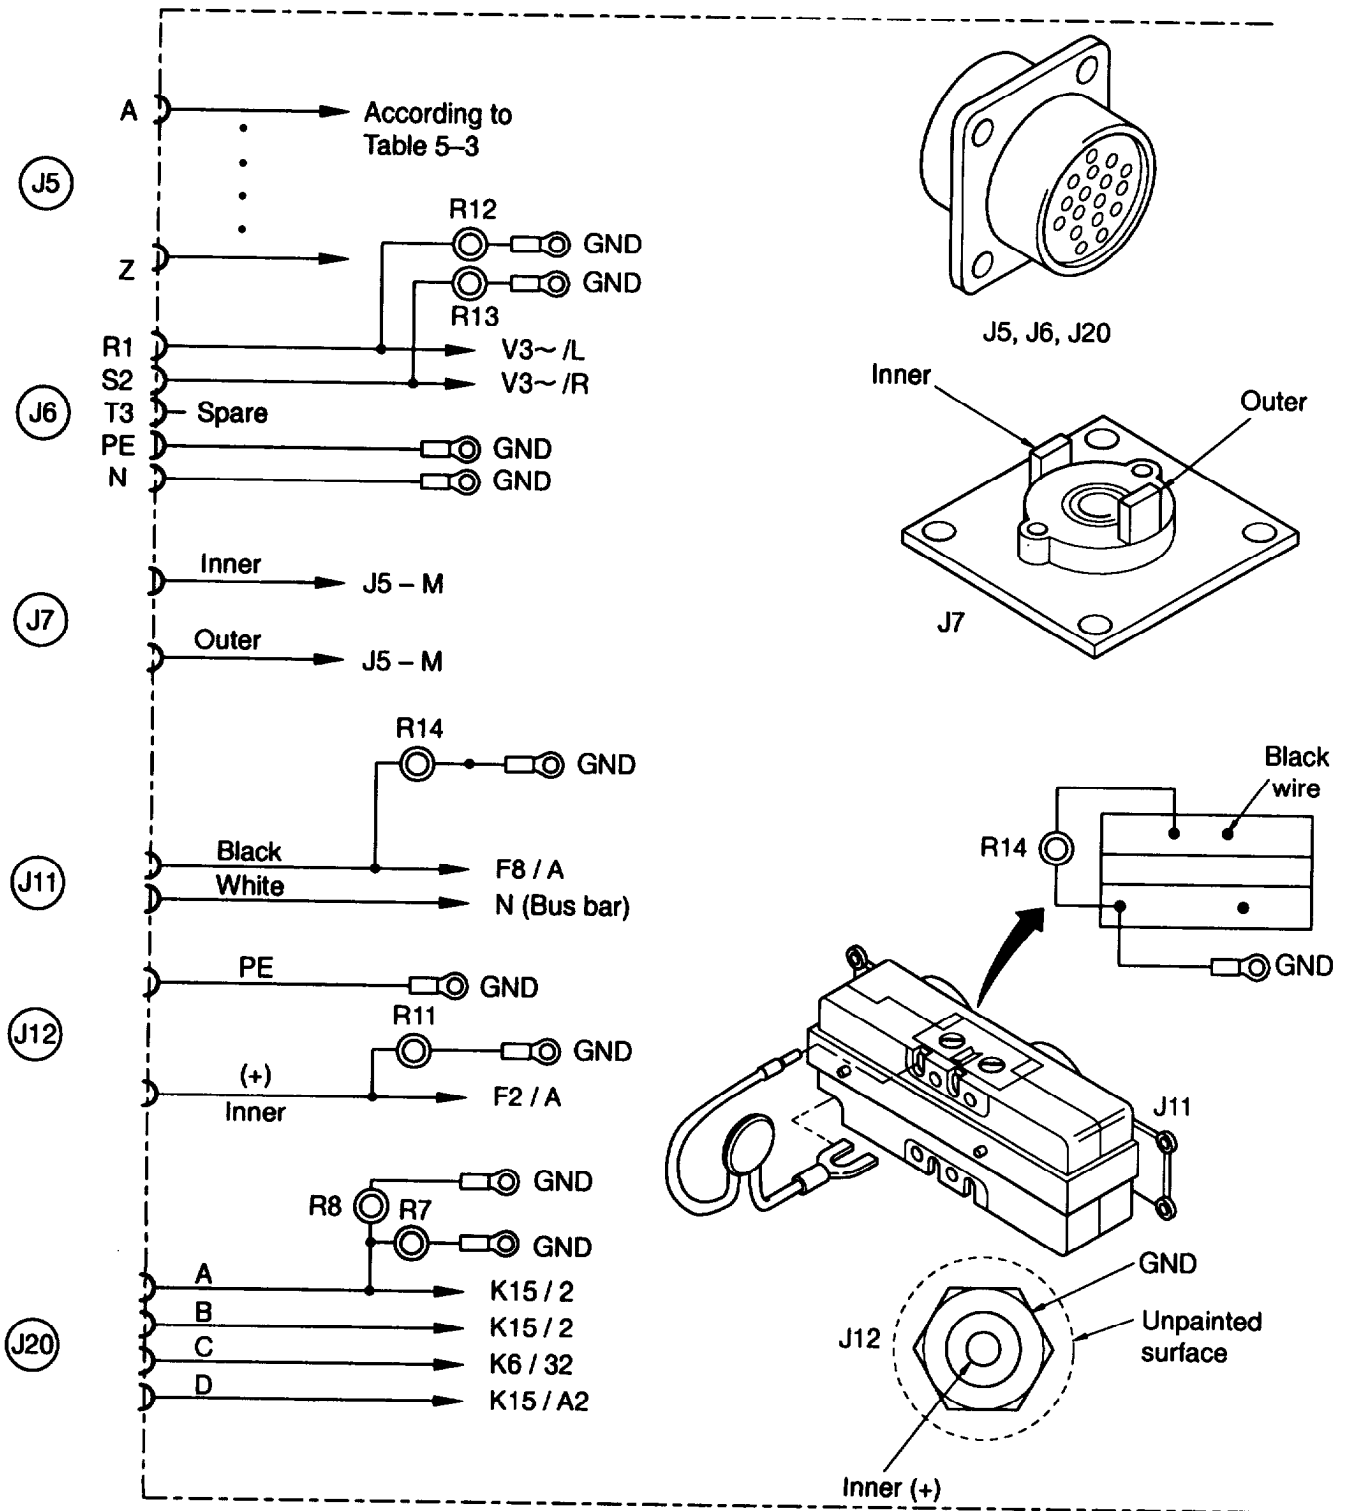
Connection Panel, Connection Diagram, Receptacles J5 to J7, J11, J12, J20.
